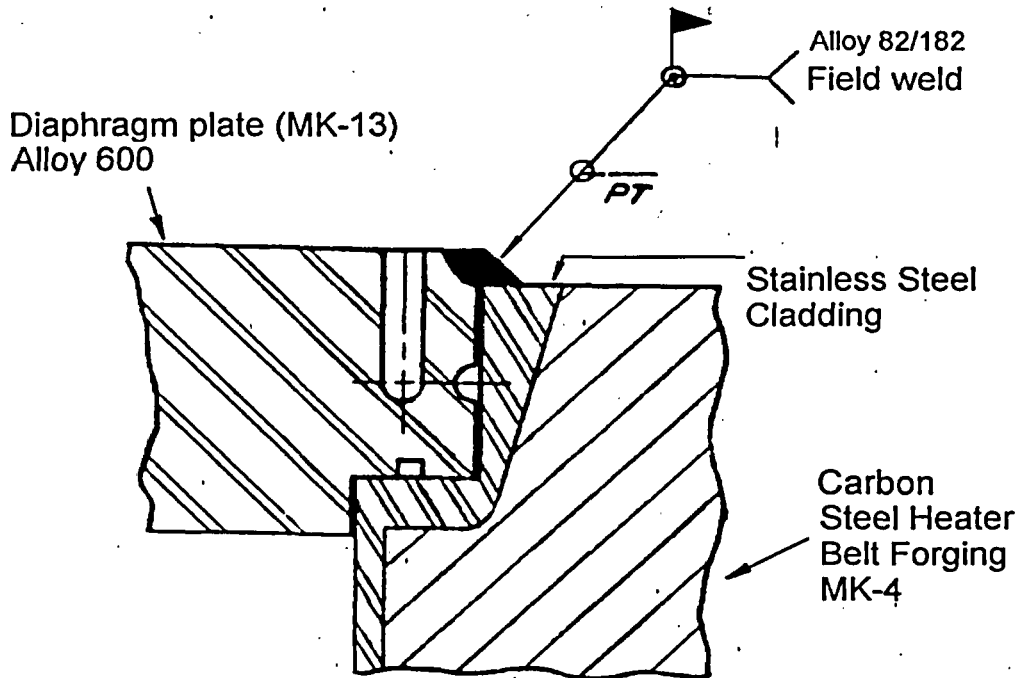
Detail of the Alloy 600 diaphragm plate to stainless steel cladding seal weld (Alloy 82/182) for the original heater bundles.
